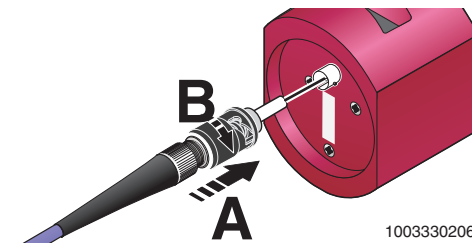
Assembling the F-SMA connector with the fiber cleaving tool
